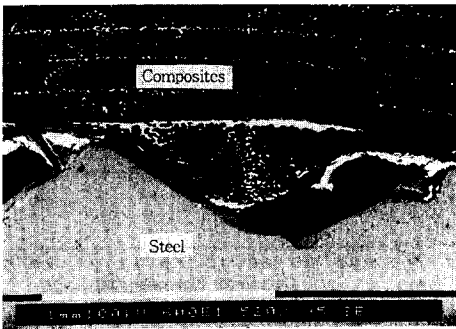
Fracture surfaces of the co-cured joint with the knurled steel adherend
